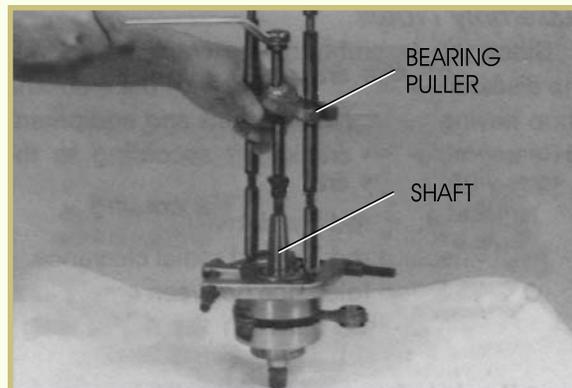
A bearing puller is often needed to remove a bearing from a shaft. (Courtesy Kawasaki Motor Corp., U.S.A.)
